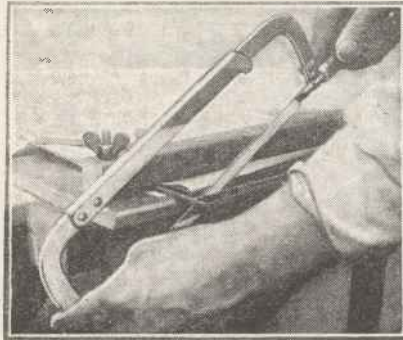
Enoch Clamp, fixed flat, and Panel being sawn to scribed line.
